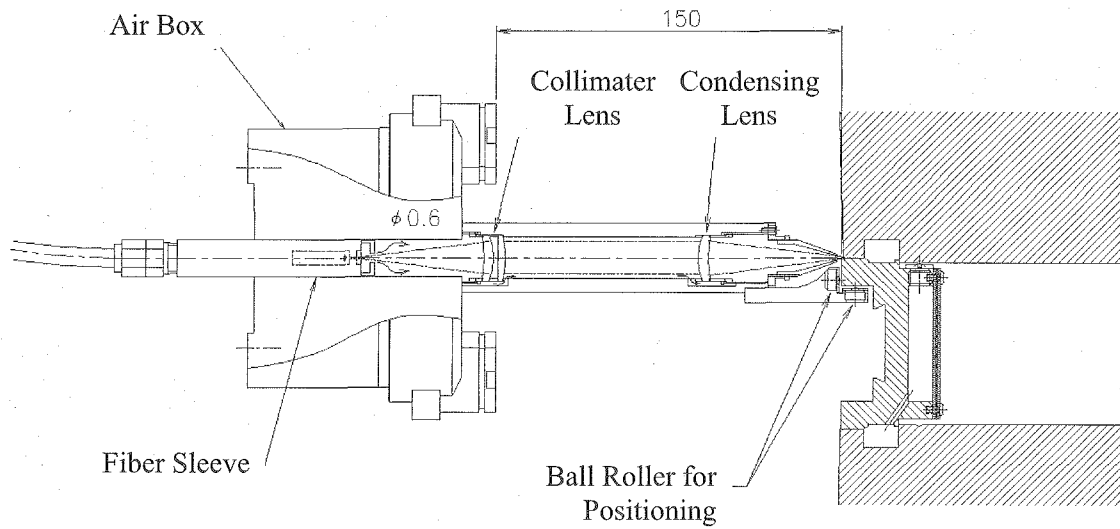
Welding Tools for Cover Plate
